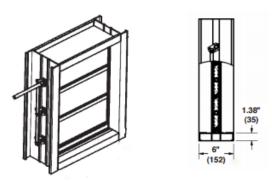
Quick-Connect T Frame Detail (VD-1251TB Only) (Width and Height are O.D. Frame)
